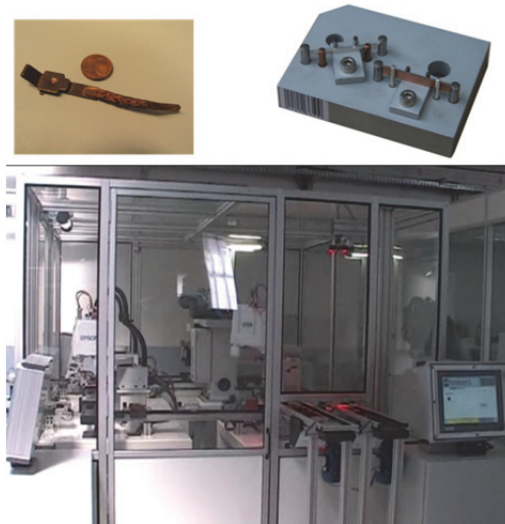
Test environment in electrical applications: Usually relatively small parts are produced in electrical applications (top left). Housings are used to place and hold the products (top right). Machines with dimensions of approx. 2m x 2m consist of devices and components for transport, welding, assembly.
